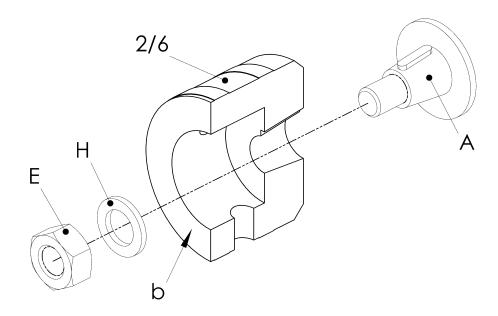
Mounting the hub (2/6) with conical drilling and feather key
